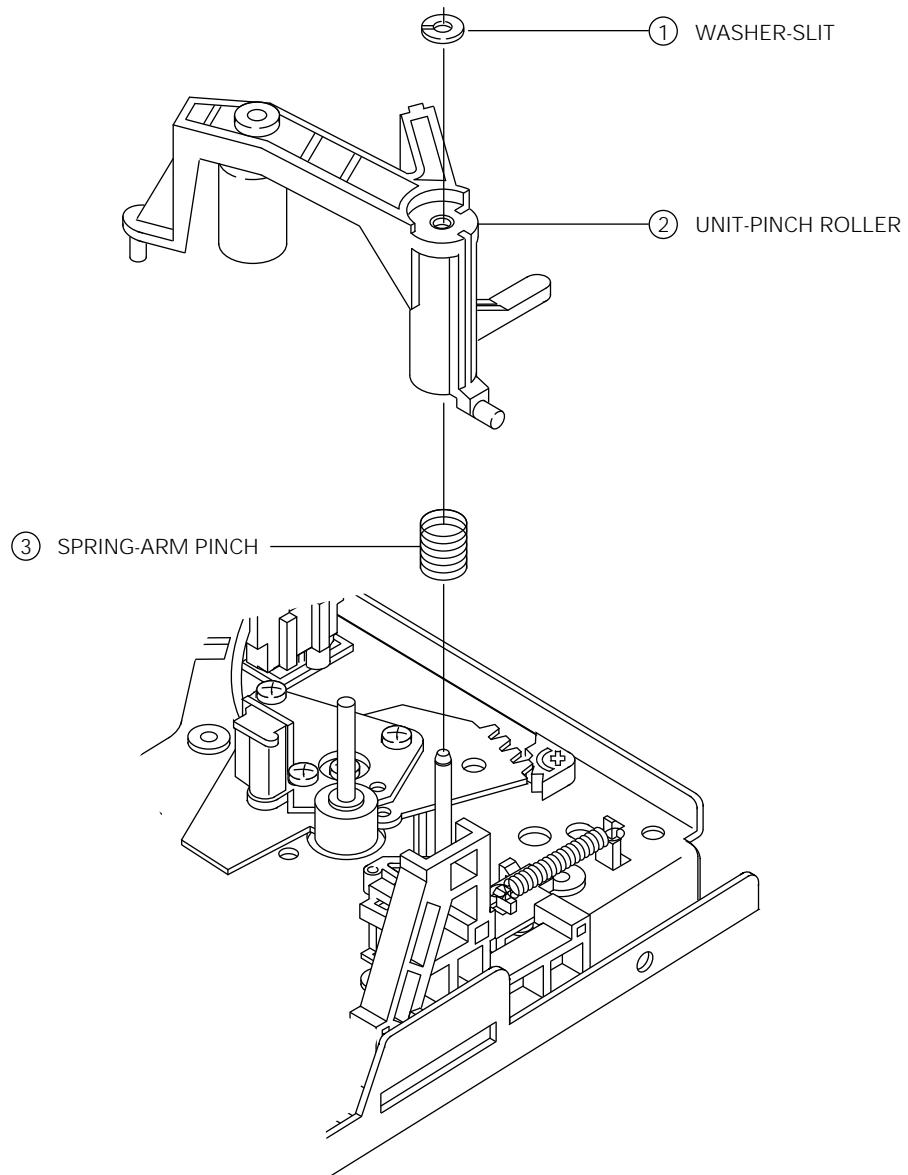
Unit Pinch Roller Ass'y Removal
